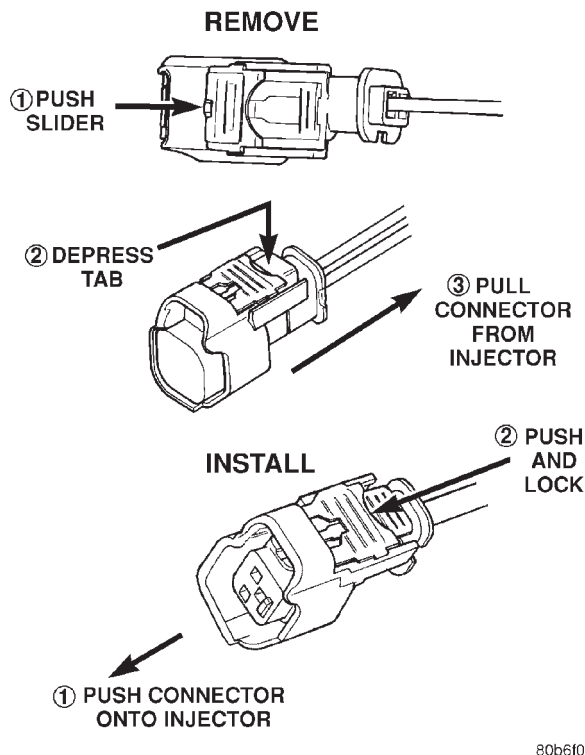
Remove/Install Injector Connector—4.0L Engine
